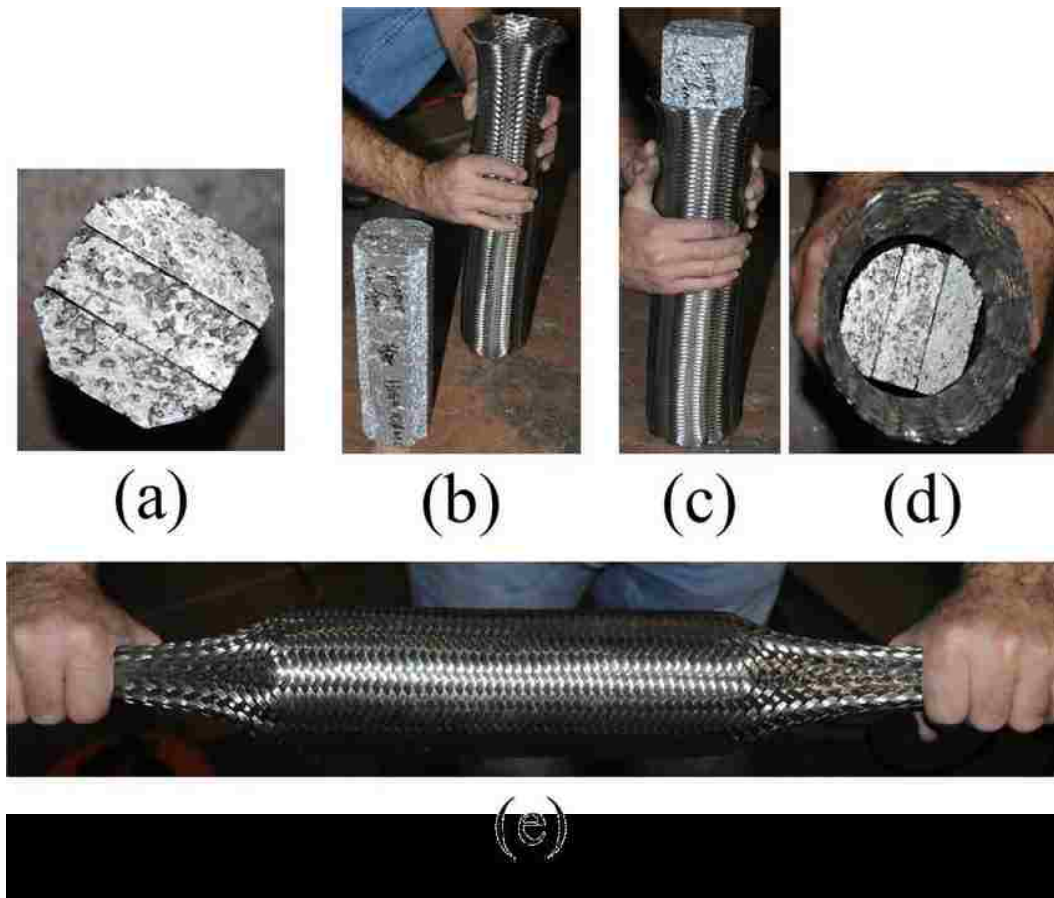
Assembly process of the rectangular high density aluminum foam filled braided tube.
